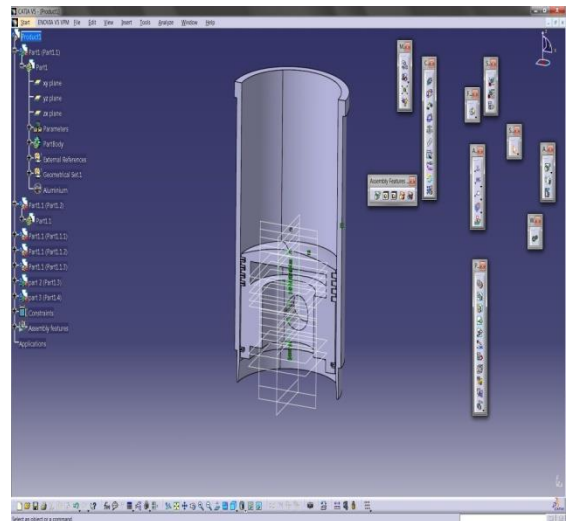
SECTIONAL VIEW OF ASSEMBLY PART
